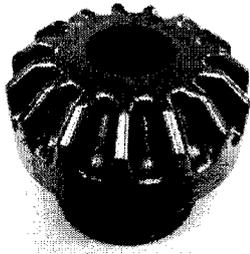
Trial gear 1, machined by WIA-V50 under the machining condition 1
